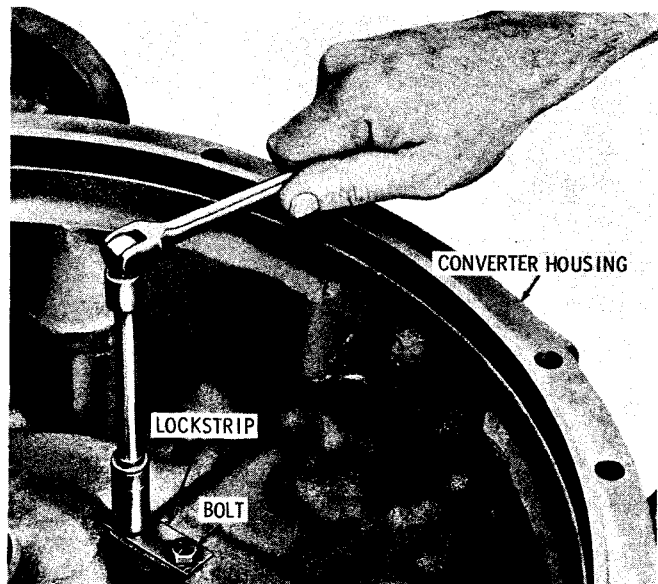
Removing pitot tube bolts (CT, CLT, VCLT) S1592
